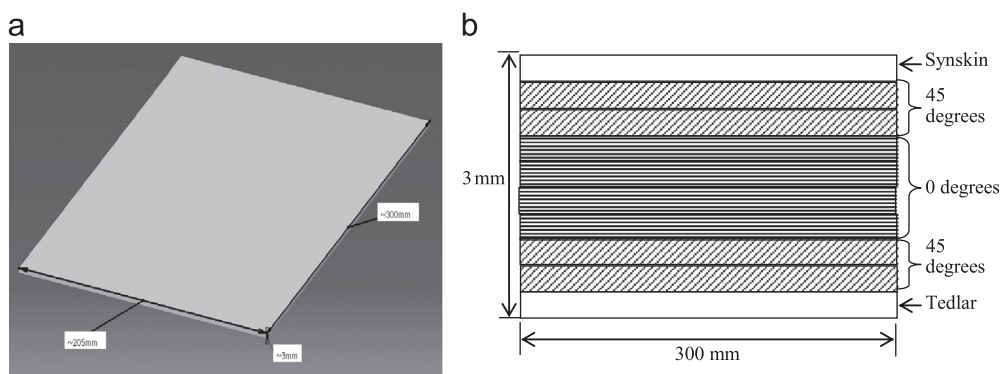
Illustration of the panel (a) The dimension of the panel and (b) Layers of a panel.
